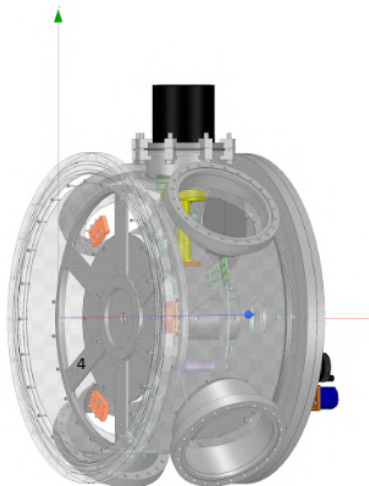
CAD image showing the calibrator cryostat with the rotating wheel (4).
